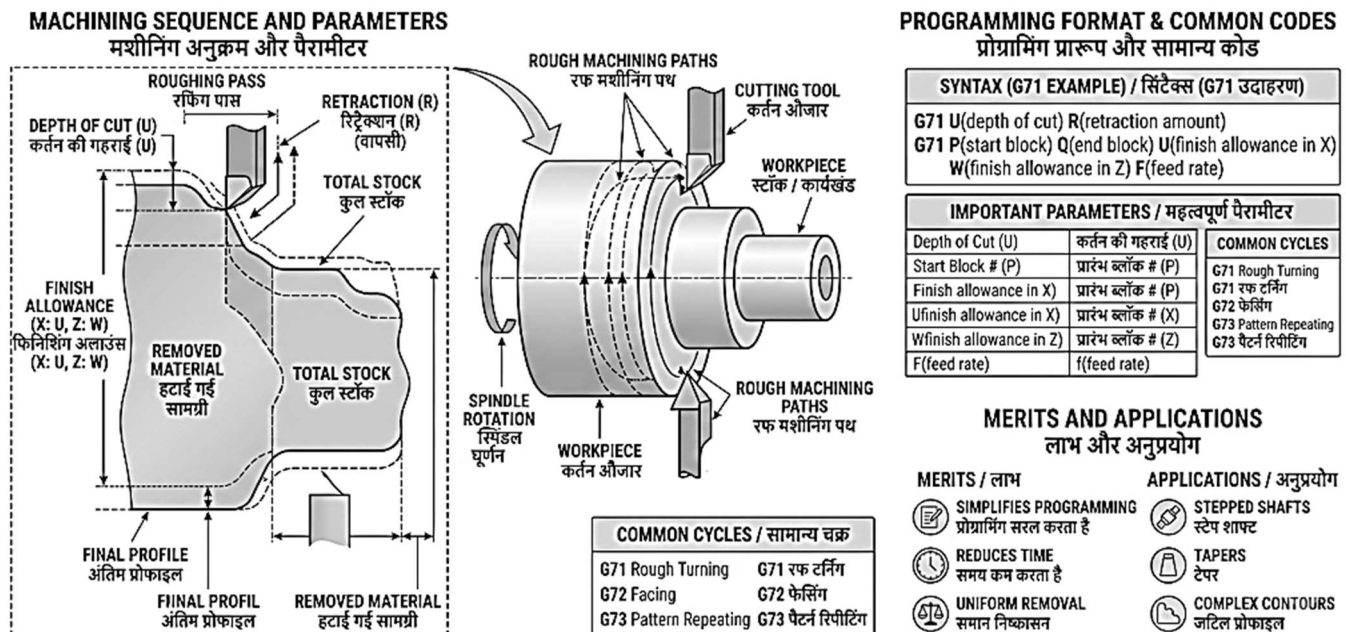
CNC Stock Removal Cycle and Machining Parameters | सीएनसी स्टॉक निष्कासन चक्र और मशीनिंग पैरामीटर
